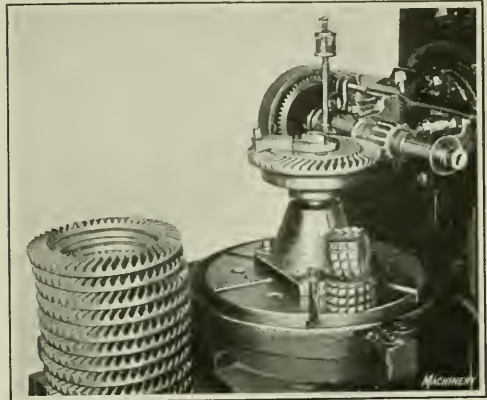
Chamfering Gear Teeth on the Hobbing Machine by the Use of a Special Hob
